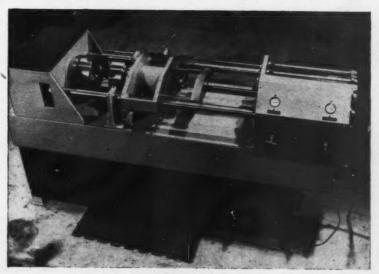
This friction welding machine has recently been built by the British Welding Research Association
